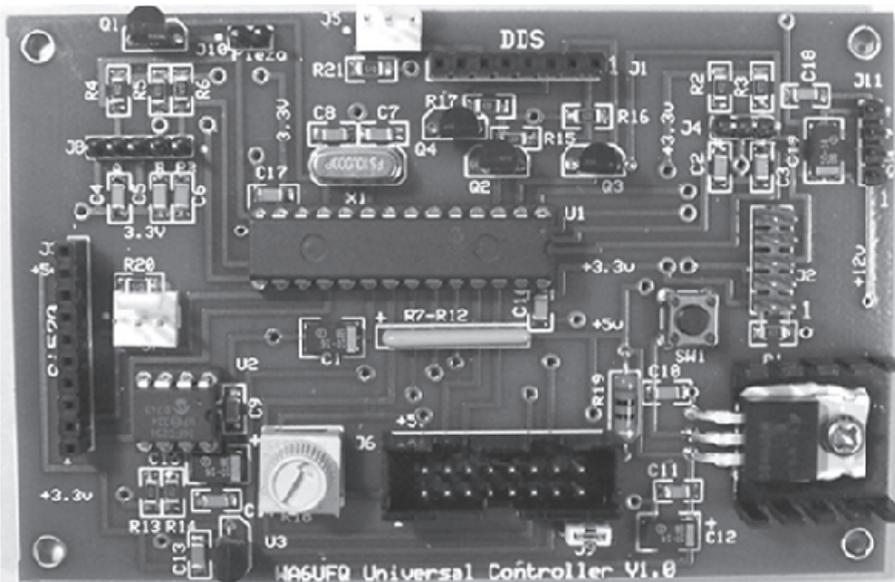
This photo shows the controller board. The socket for the Si570 oscillator card is located on the left side of the board; the socket for the DDS oscillator card or the interface cable for the WB6DHW boards is located at the top of the board. The PIC24 is in the center of the board.
